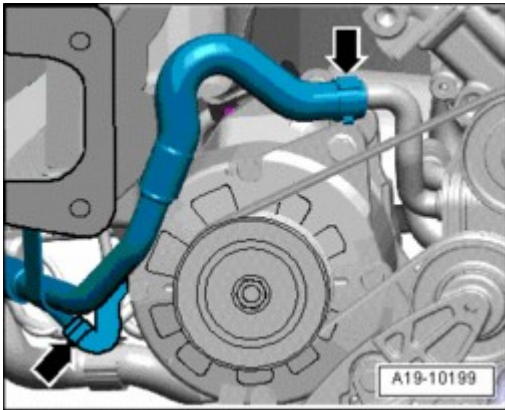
Removing Coolant Hoses To Oil Cooler At Engine And To Generator
